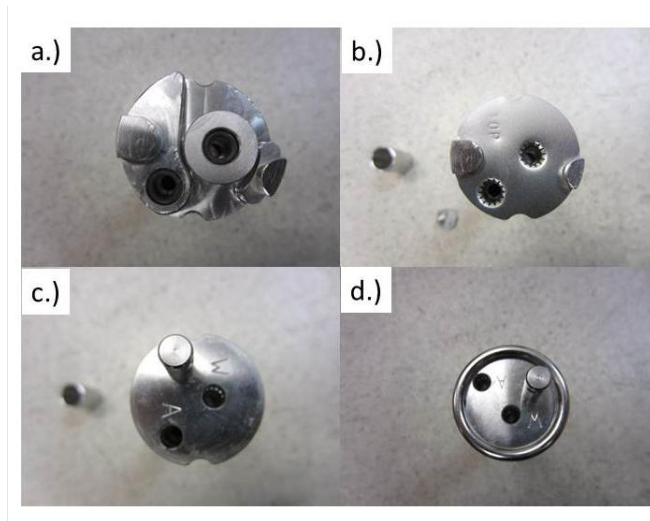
Assembly of the fitting plate at the top of the pump for holding the air and water lines. (a) Bare top of pump. (b) Fitting/grab plate added (“TOP” must face upwards). (c) Top plate added. (d) Collar added to lock parts (a-c) together.
